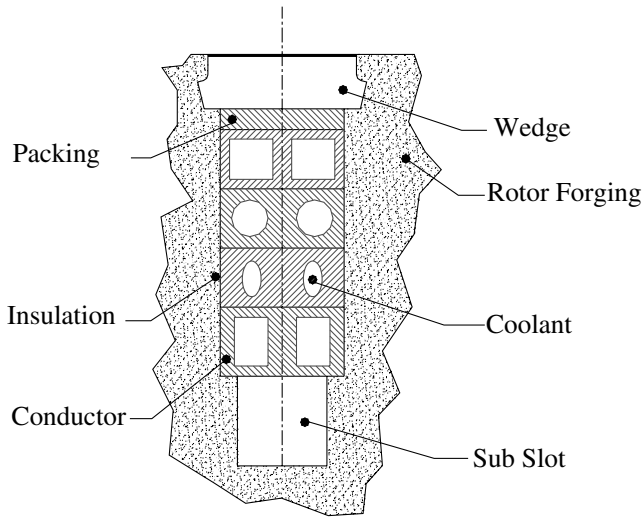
Internal cooling channels geometries in copper winding of rotor slot.
